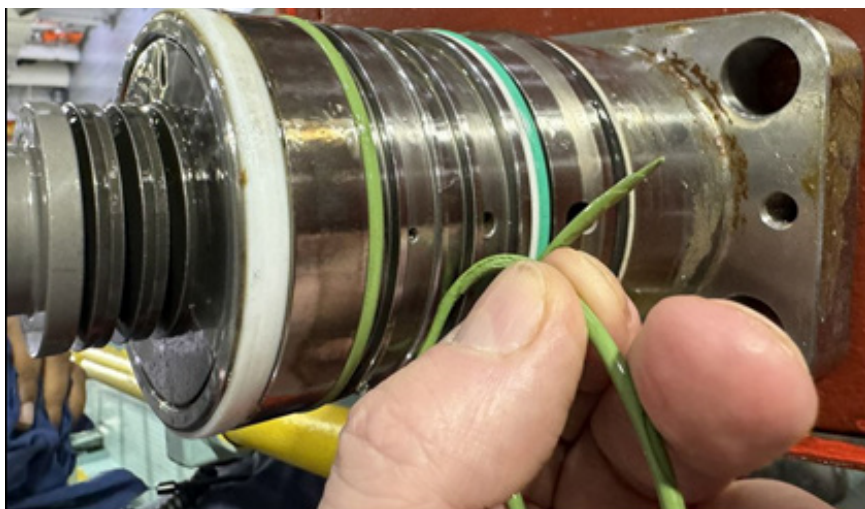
O-rings deteriorating rapidly, leading to internal sealing oil leakage
